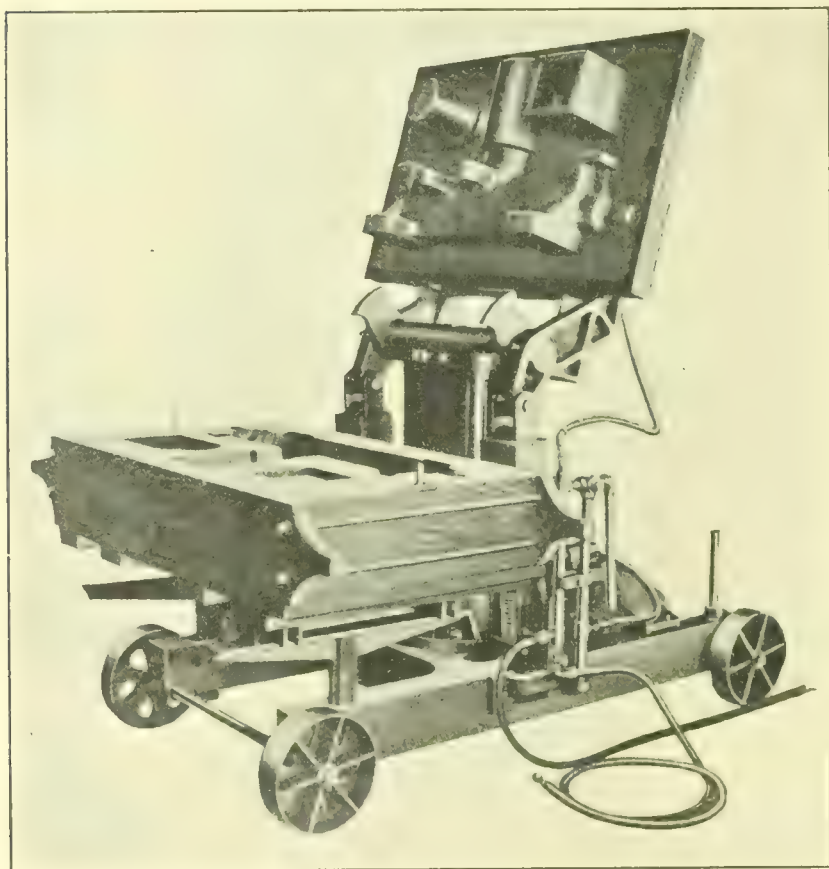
MOULDING MACHINE WHICH ROLLS OVER AND DRAWS THE PATTERN.
